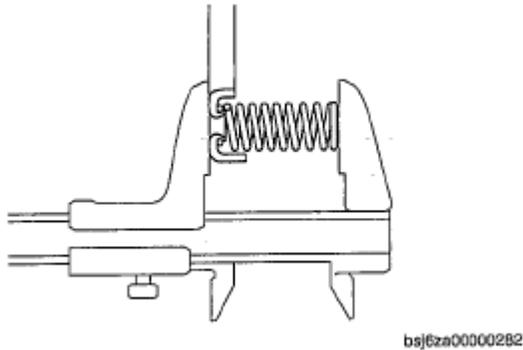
Measuring Free Length Of Piston Return Spring Using Vernier Caliper
